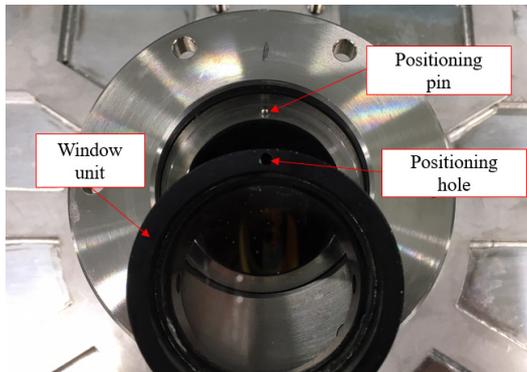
Positioning pins (protrusions) of the transmitter unit and positioning holes of the window unit. Assemble so that they fit
